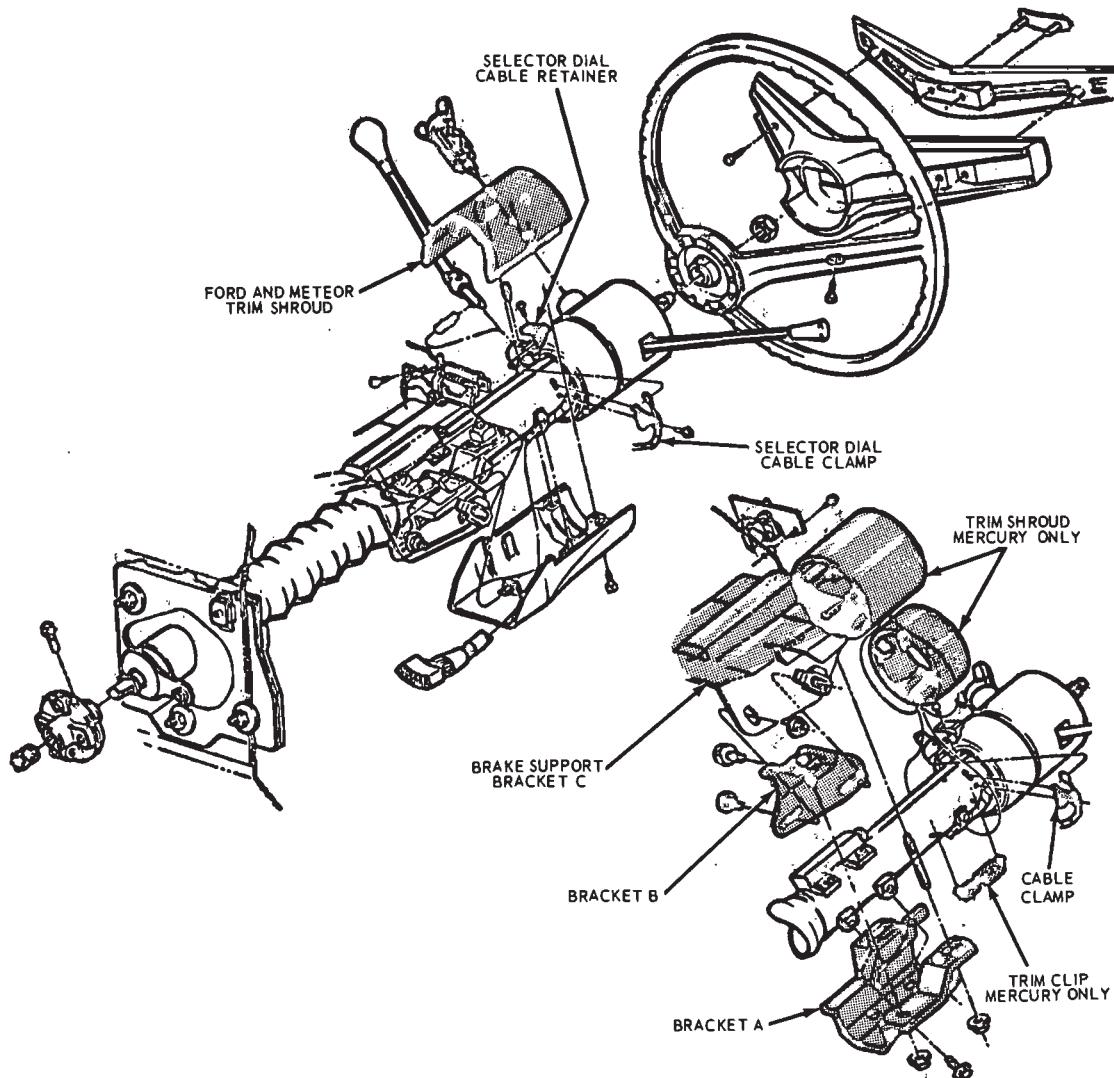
Fixed Steering Column Installation—Fairlane, Montego
